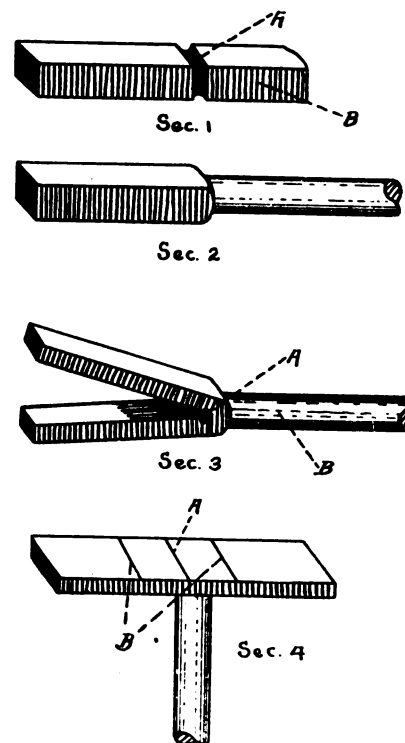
STEPS IN FORGING THE ROD WITH CLAMP CONNECTION
